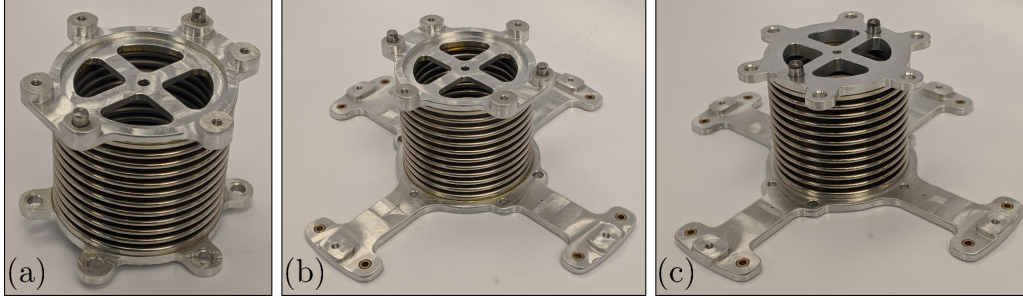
Counting from the base of the segment, the continuum structure is built from one subassembly (a), four subassemblies (b), and one subassembly (c).
